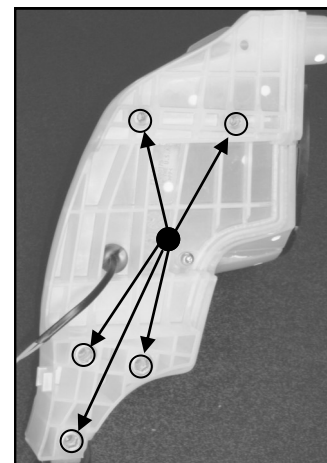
Amp Mounted On Top Of Radio Power Plug Should Be On Brake Side
